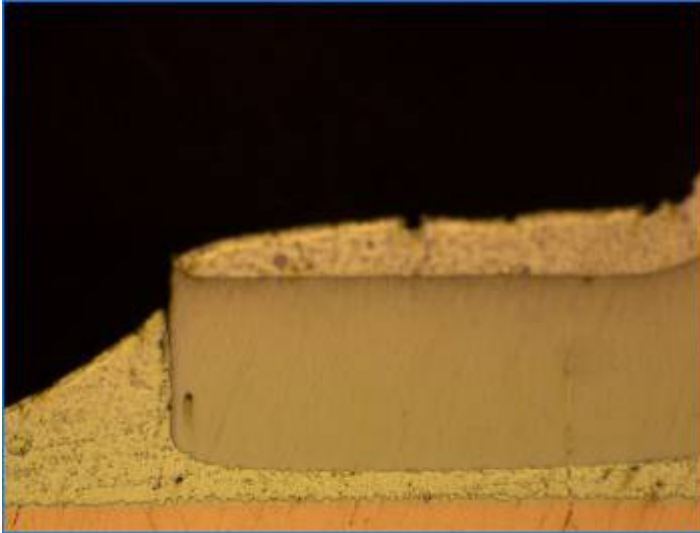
cross section, SN66, U62, left lead solder crack, 200xa
